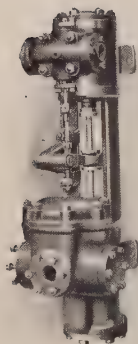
Vertical Simplex Piston Pump, Cap and Valve-plate Type.
